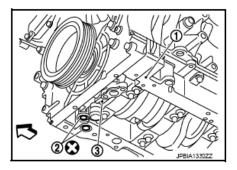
Locating Lower Cylinder Block, Oil Pump And O-Rings Courtesy of NISSAN NORTH AMERICA, INC.
